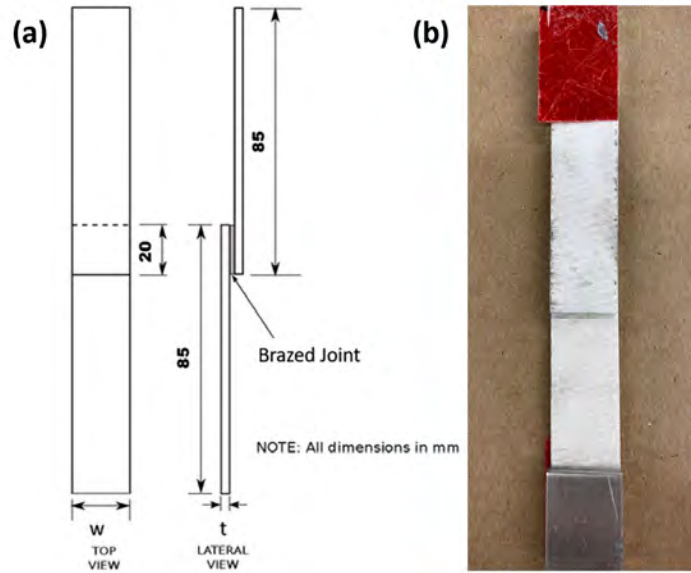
Nextel™ 720/A single-lap-joint brazed test specimen: (a) Drawing [6], (b) Test Specimen
